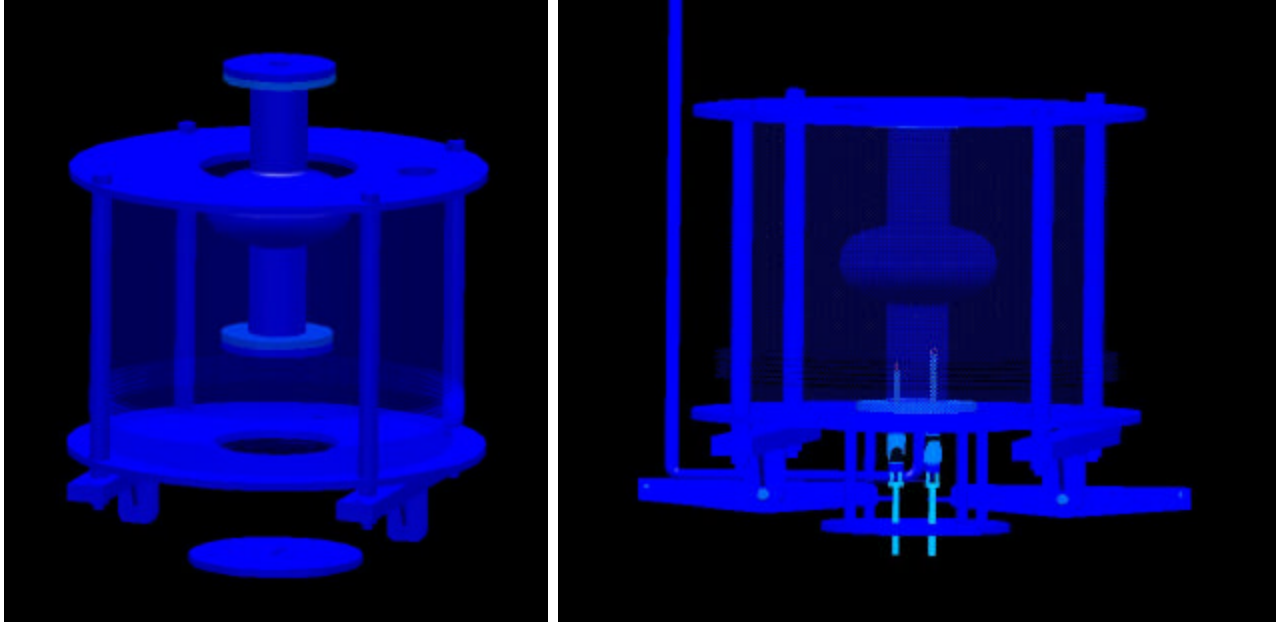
Left: Introducing the host cavity into the cryostat and attaching the bottom cryostat flange. Right: Attaching the couplers and coupler drive system.
